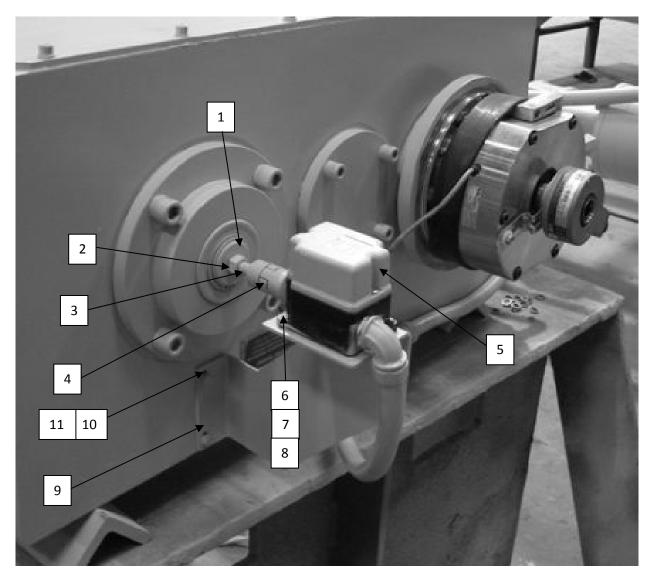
A, HOIST DRUM ASSEMBLY 25 TON
